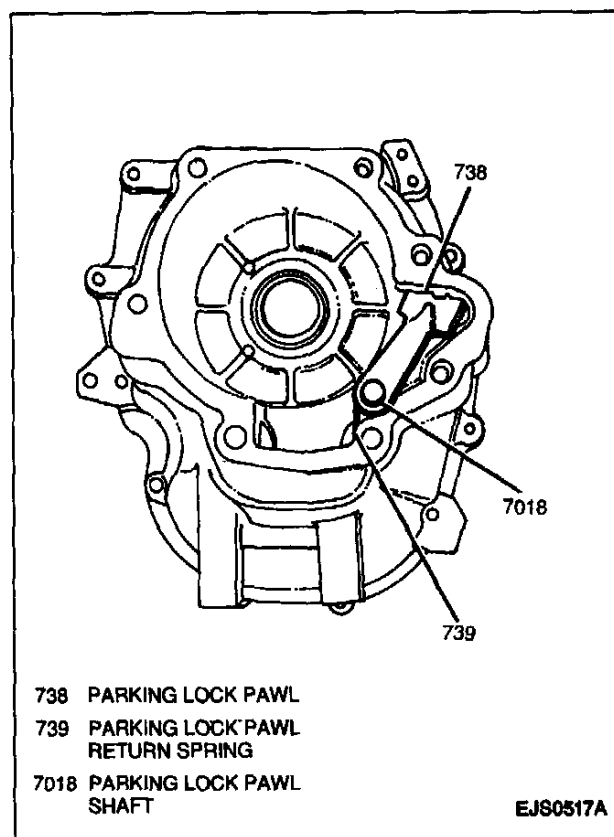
Parking Lock Pawl, Parking Lock Pawl Shaft and Parking Lock Pawl Return Spring
